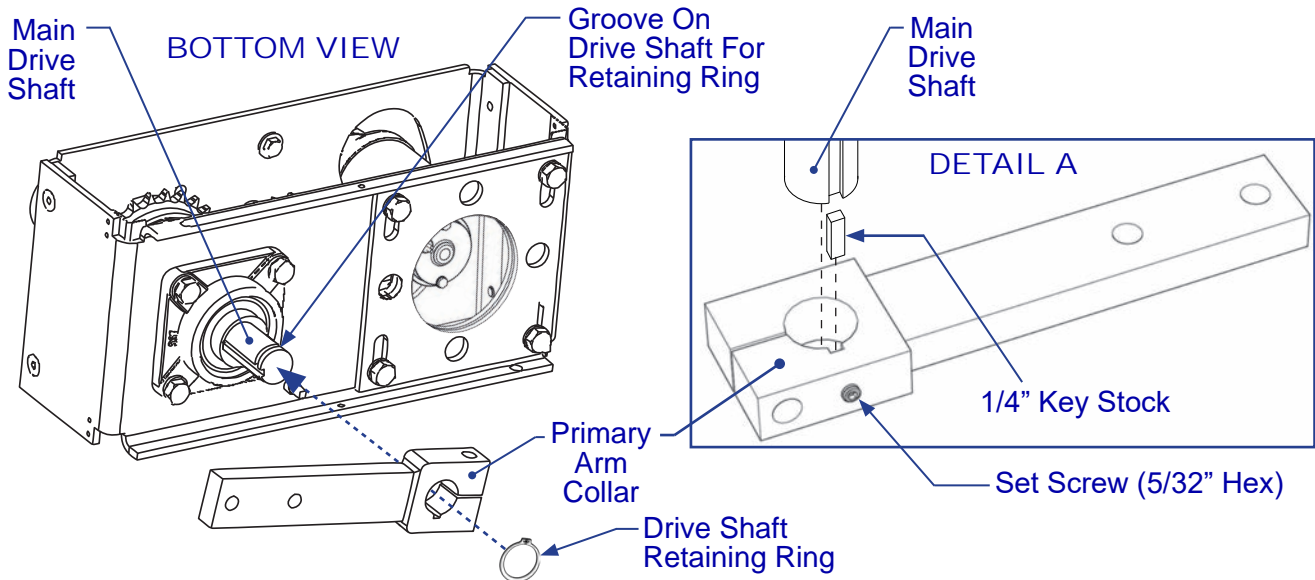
Mounting Primary Arm Collar To Main Drive Shaft
